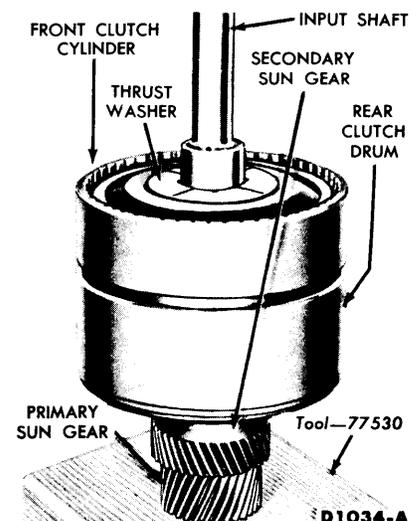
Input Shaft, Clutches and Primary Sun Gear
